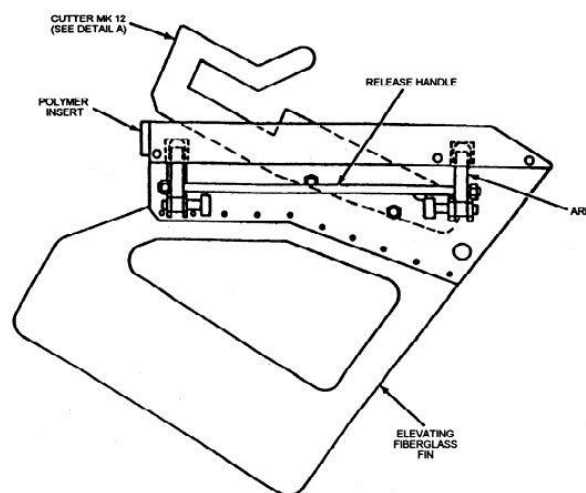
Modified Mk 12 Mod 2 cutter assembly.
